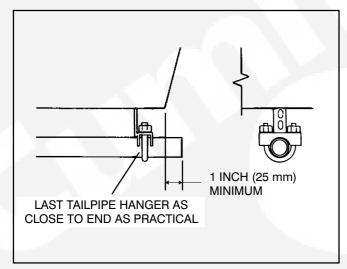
TERMINATING THE EXHAUST TAILPIPE
